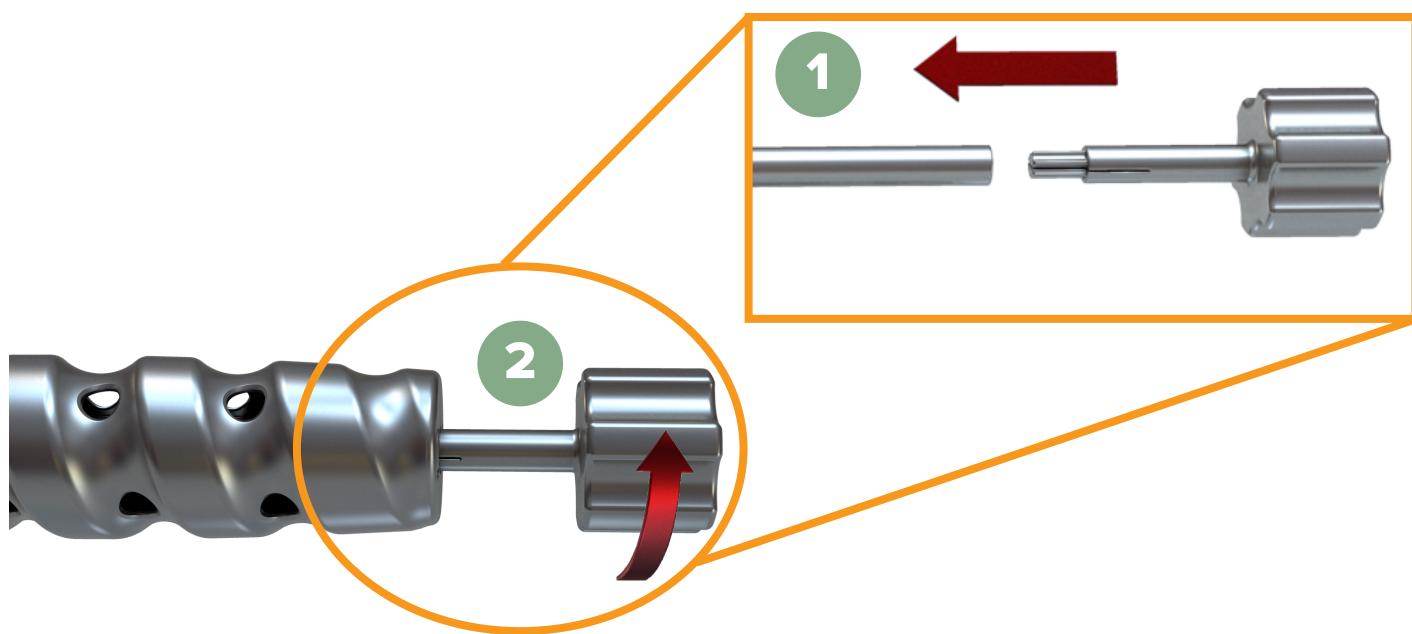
Using Draw Rod Driver (T070-0001-07) to thread inner rod into Main Core Inserter (T070-0001-A2)
